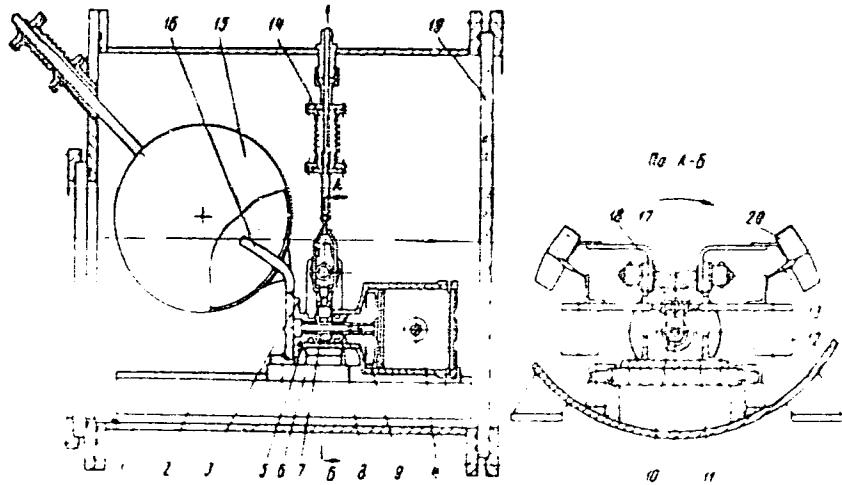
1--vacuum box; 2--directional guide; 3--friction disc; 4--driving mechanism; 5--housing; 6--plate; 7--assay bushing; 8--shaft; 9--union, 10--race; 11--beam, 12--arm; 13--release device; 15--copper container, 16--copper tire, 17--spring, 18--arresting device; 19--window; 20--dial.
